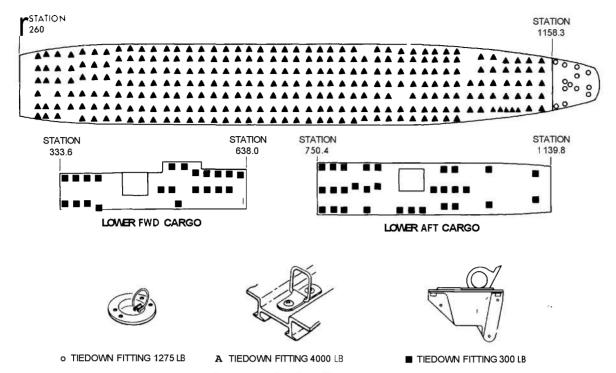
ANCHORING ARRANGEMENT, C-121/1049H AIRCRAFT
